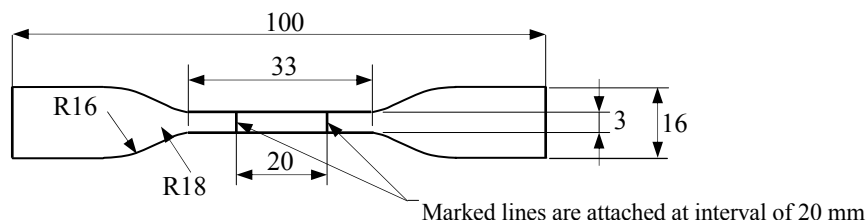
Dumbbell test pieces geometry for tensile test (unit: mm)
